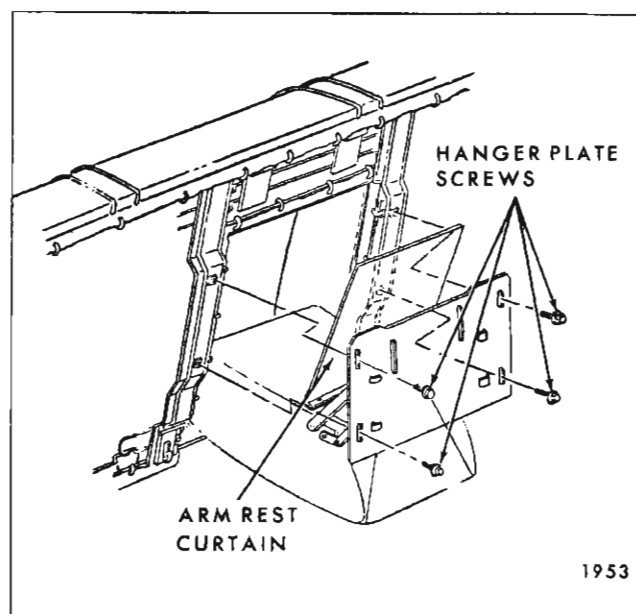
H52—Rear Seat Back Arm Rest and Hanger Plate
